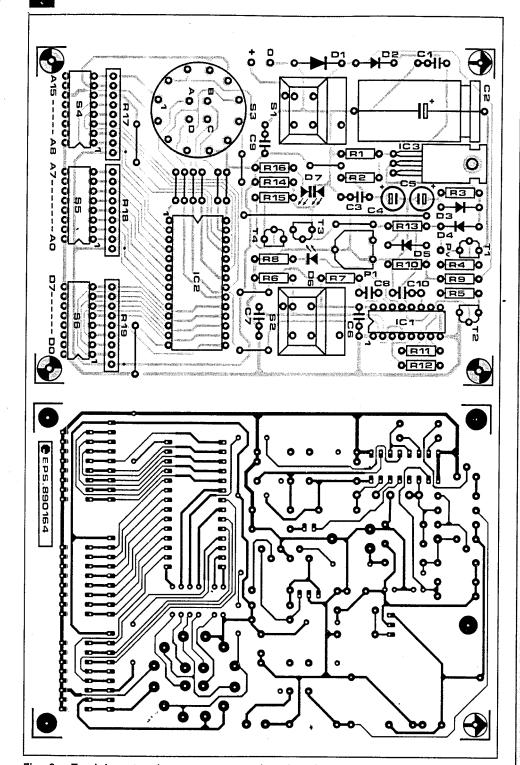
Track layout and component mounting plan of the single-sided PCB for the mini EPROM programmer. Start the construction with fitting the wire links.
